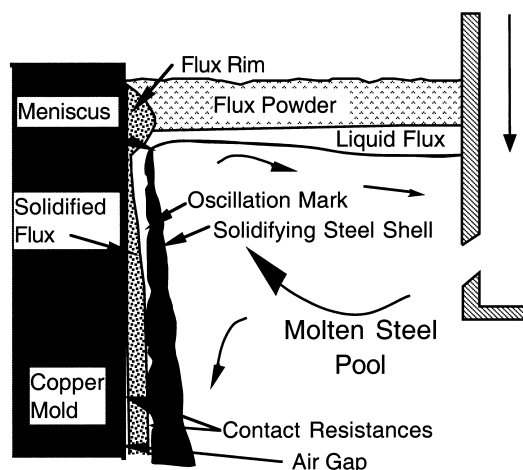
Schematic of continuous casting process showing casting flux layers.
